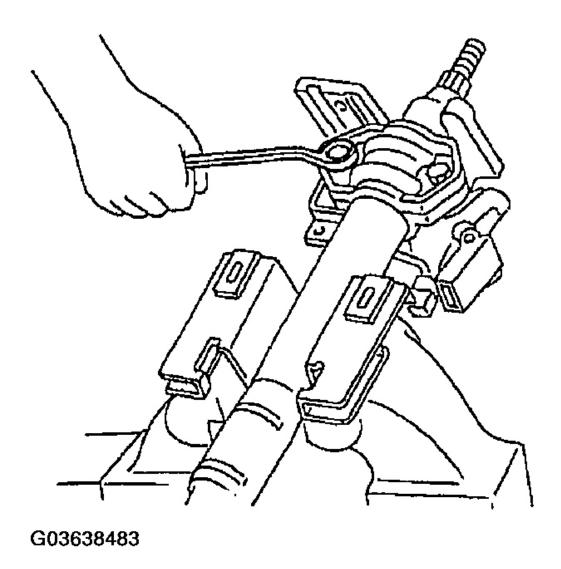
Installing Steering Lock Mounting Bolts Courtesy of MAZDA MOTORS CORP.
